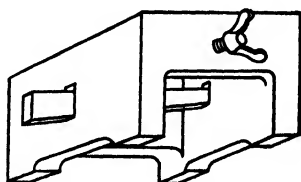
Using wedge to hold work up against bushing plate. As with cam lever the amount of movement is limited as taper must not be too steep to hold wedge in place.
